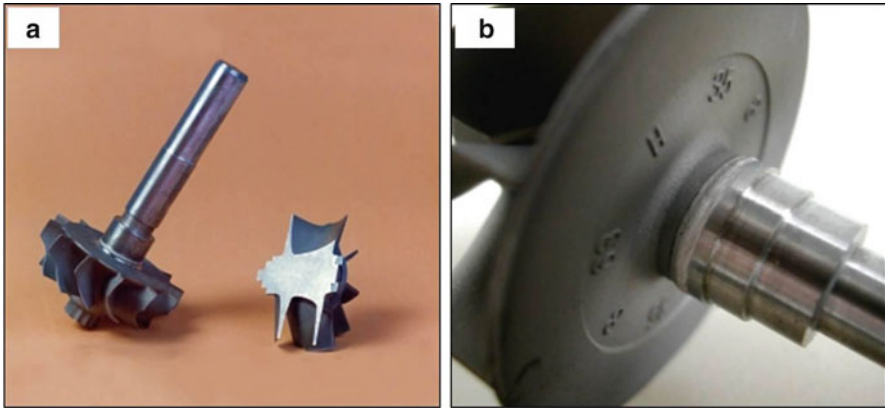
(a) Turbocharger impeller and its cross-sectional view, and (b) magnified view of the welded location showing joint between shaft and impeller (http://www.ptreb.com/Industries/Automotive/Turbocharger_Impeller_Welding/; last accessed on 11 November 2013)
